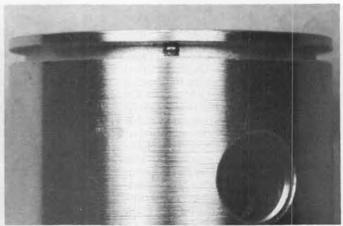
Pin in ring groove of piston, which stops rotational movement of ring; prevents snagging of ring gap in porting holes.
